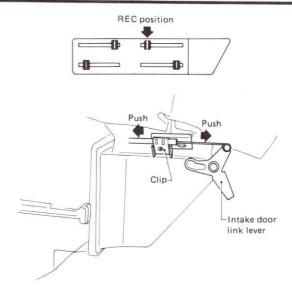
Adjusting intake door central cable (Sec 32)
